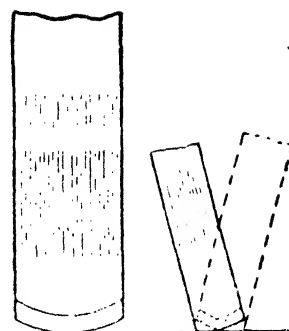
USING CHISEL FOR CUTTING SHEET
